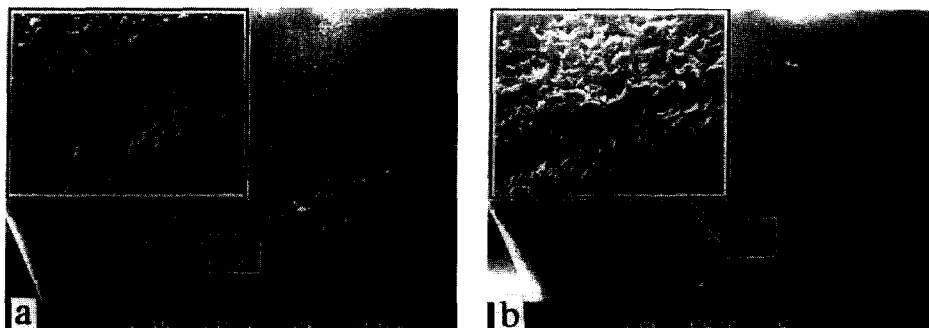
Scanning electron micrographs of worn edges of fine and coarse grains: (a) fine-grain sintered diamond tool; (b) coarse-grain sintered diamond tool. (Cutting distance = 150 m; workpiece: L type composite.)
